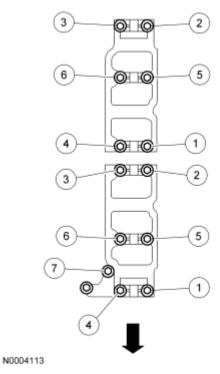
Bearing Caps & Camshaft Courtesy of FORD MOTOR CO.
